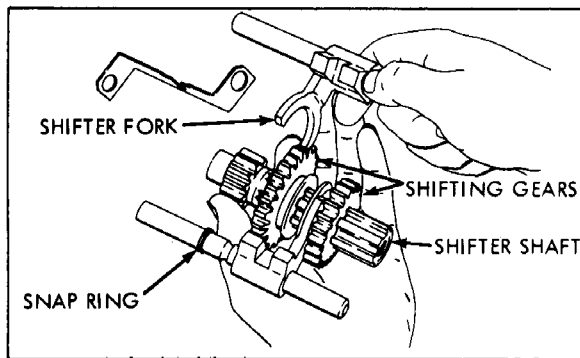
Assembling Shift Fork, Gears and Shaft Assemblies
